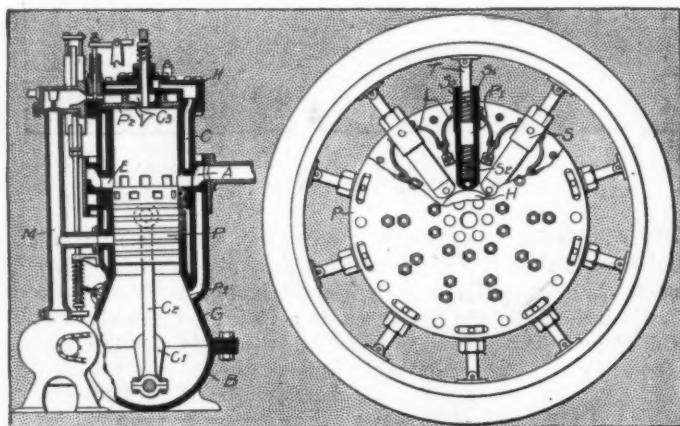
Lake internal-combustion motor. Fig. 2—Oldham telescopic spring wheel
